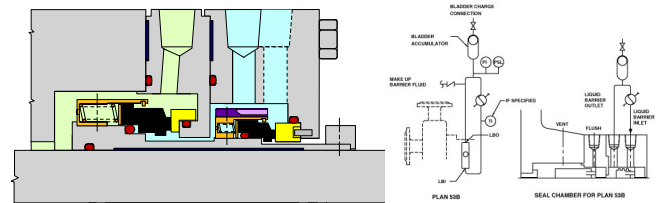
API Arrangement 3 plus Typical Piping Plan.
